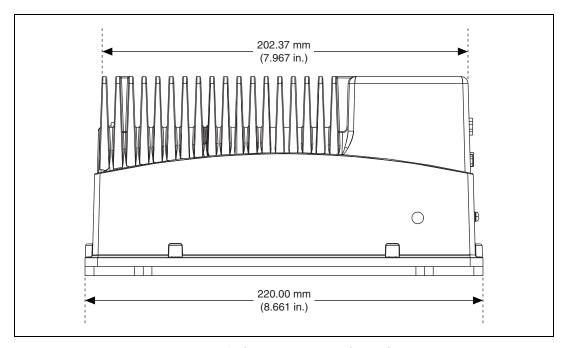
Side View of the NI EVS-1464 Series Device with Dimensions
